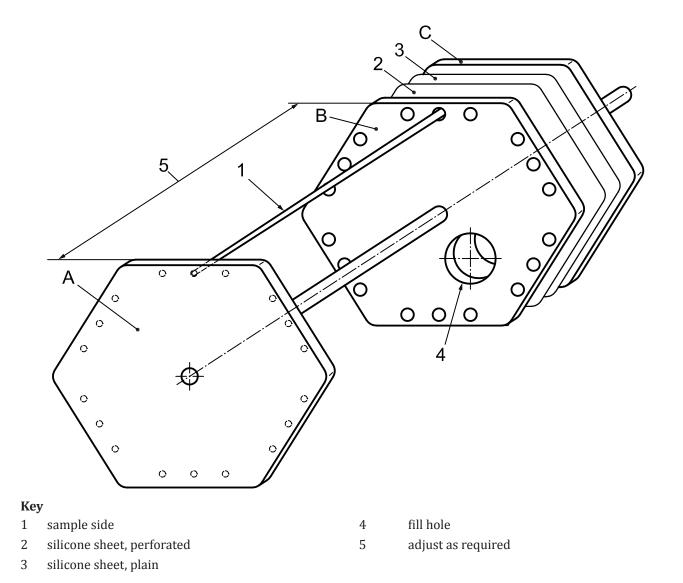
Exploded diagram of retaining assembly for spectacle sides
